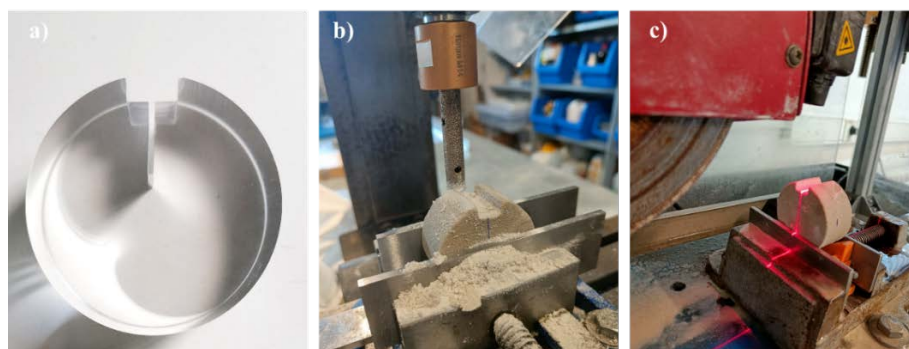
a) PMMA sample; b) Cutting the groove in a sandstone sample using a milling machine; b) Cutting the notch in a sandstone sample with a saw disc.
